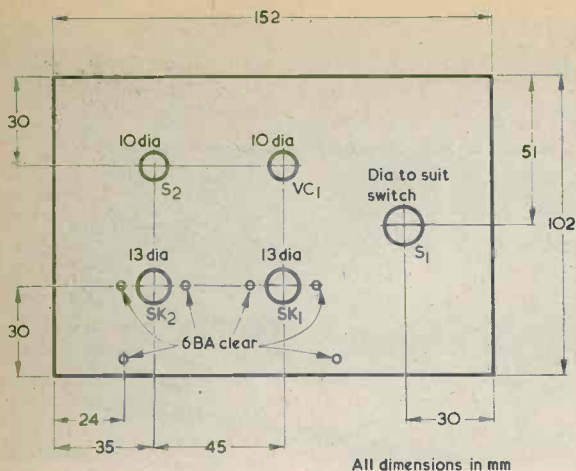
Drilling details for the front panel. The two bottom 6BA clear holes are marked out with the aid of the component board and should be positioned such that the board clears the inside surfaces of the case bottom and left hand side.
